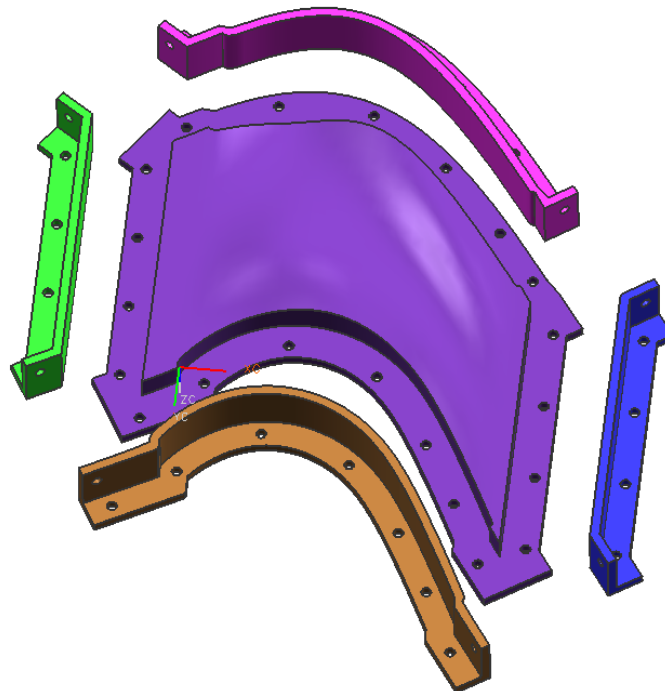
Contoured endwall foam mold components (exploded assembly).
